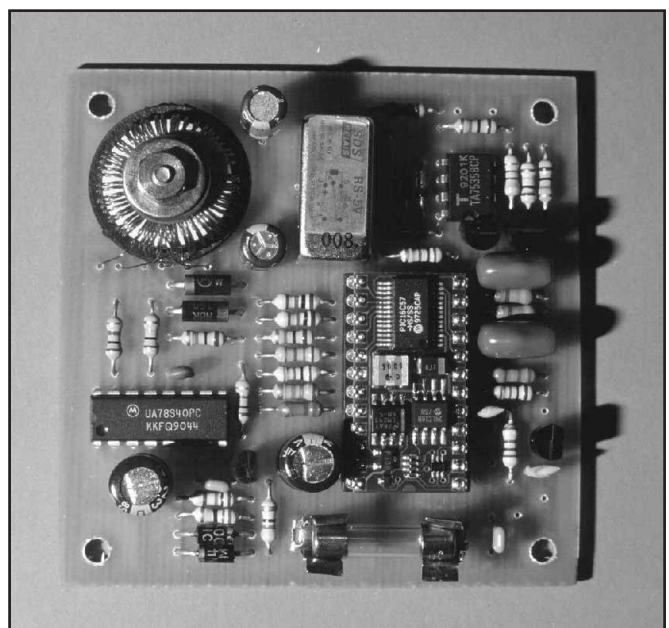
The completed controller on its single-sided glass epoxy printed circuit board.
